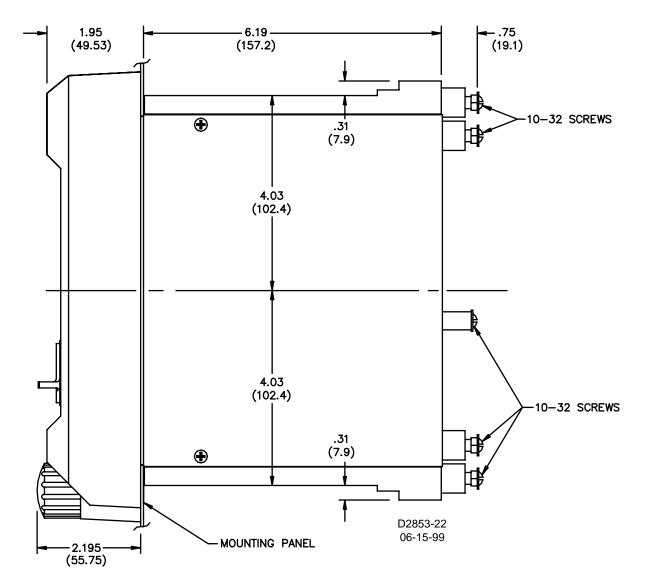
Outline Dimensions, Side View, Semi-Flush Mounted, Double-Ended Case
